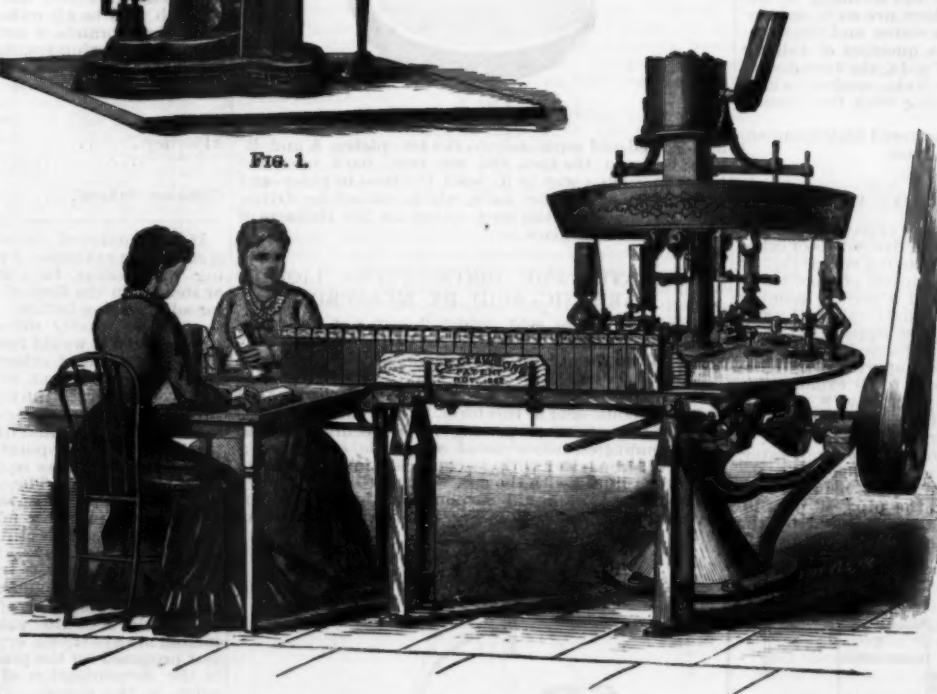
AUTOMATIC WEIGHING MACHINE.
